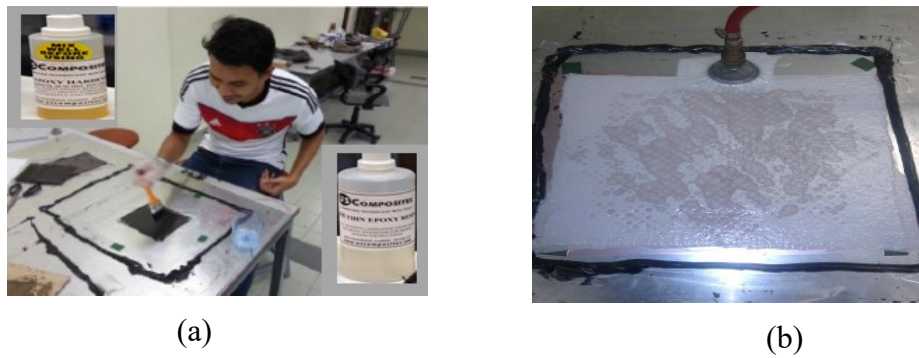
Carbon fiber fabrication (a) hand lay-up's method, (b) Vacuum bagging process
